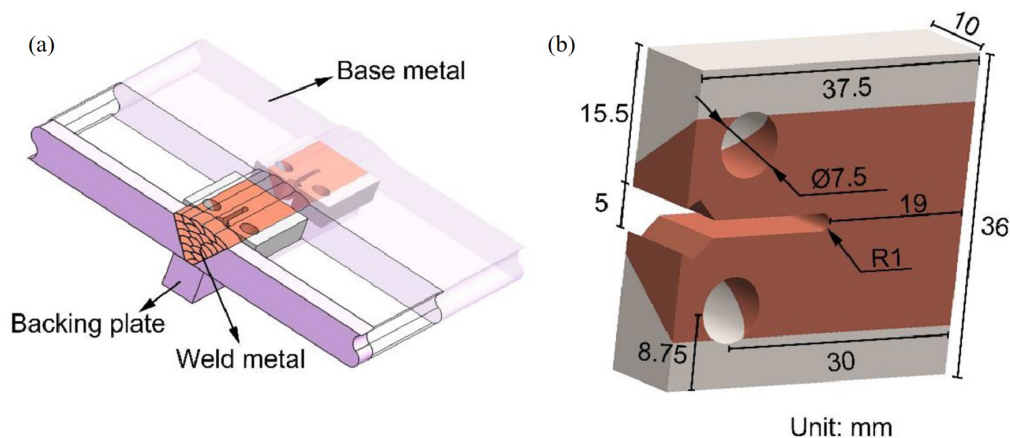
CT-like specimen with industrial welds for SRC tests with (a) position of the CT specimen in the super 304H welded plate and (b) geometry of the CT specimen with the weld in orange and base metal in grey [181].
